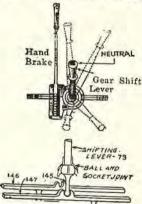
Ball-and-socket type of gear-shift lever, with three speeds forward and reverse. The gear-shift lever (73) is now upright in the center of the socket and is in "neutral" position.
